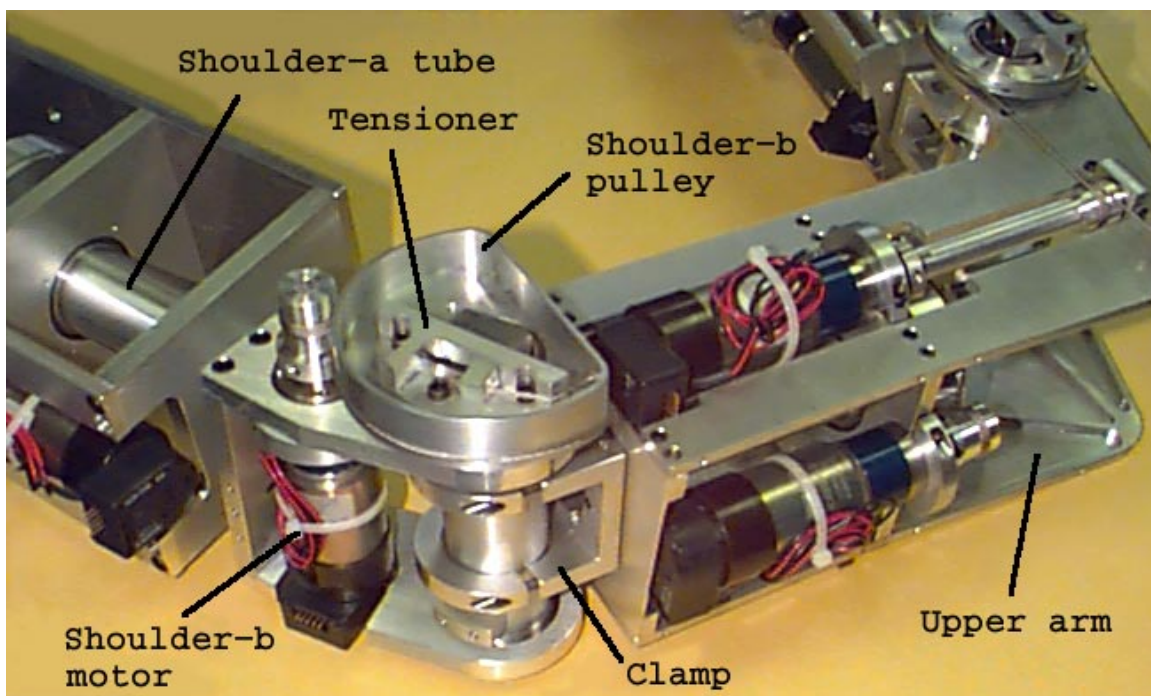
Robot shoulder joint. The photograph shows the shoulder joint and the upper arm. The shoulder-b joint is shown most clearly with the motor, pulley, tensioning mechanism tube and clamp all in the middle of the picture. The upper arm is clamped onto the shoulder-b tube in order to allow quick assembly.
